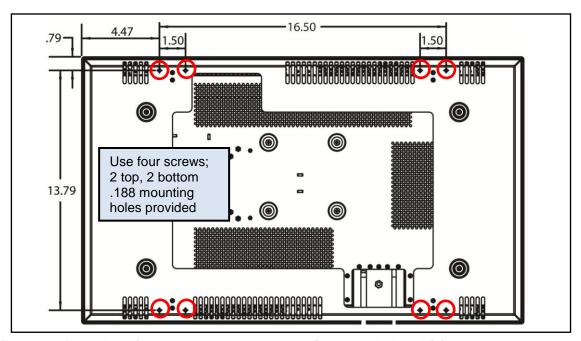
Rear view of the 2601-800 cosmetic back (shown with chassis) for a proud mount
